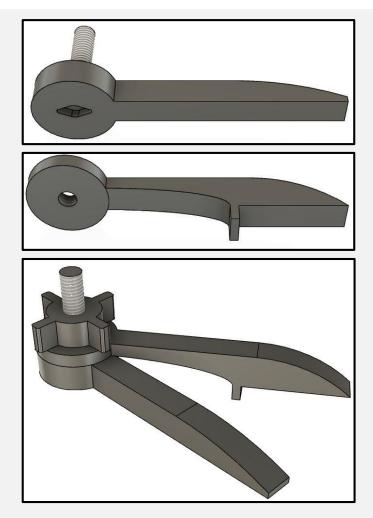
(Top to bottom): Reference arm that fits on the diamond key of base plate; rotating arm that rotates about the bolt on the reference arm; assembly of the two arms tightened using a nut.
